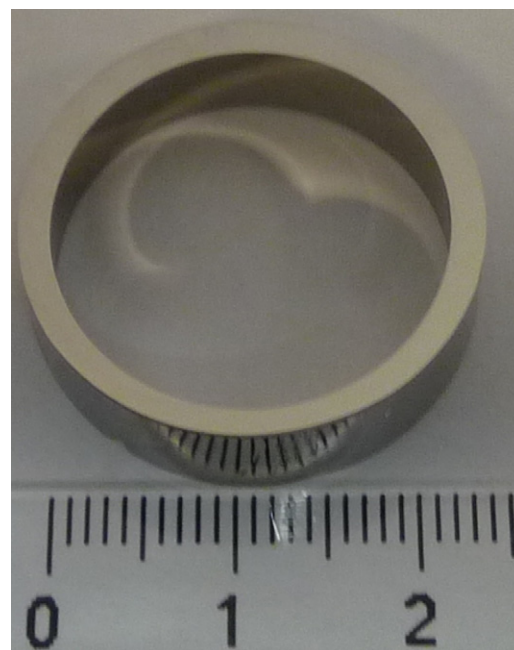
A glassy ring cut in cross-section from the optimized parameter casting.
